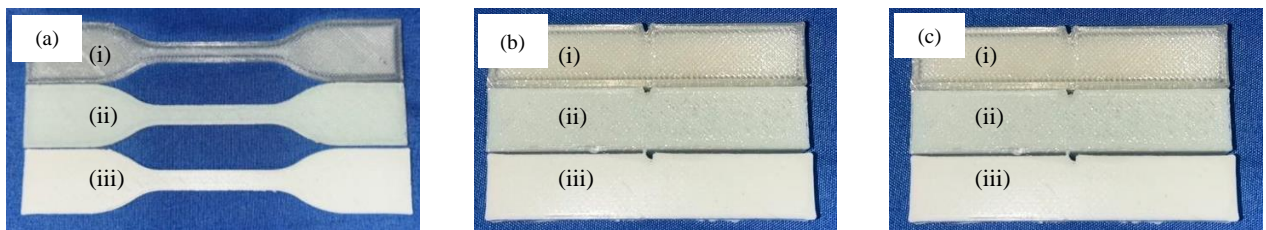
The 3D printed specimen for (a) tensile testing, (b) impact testing and (c) flexural testing and (i), (ii) and (iii) for PLA, PLA/10FsHAp and PLA/20FsHAp respectively
